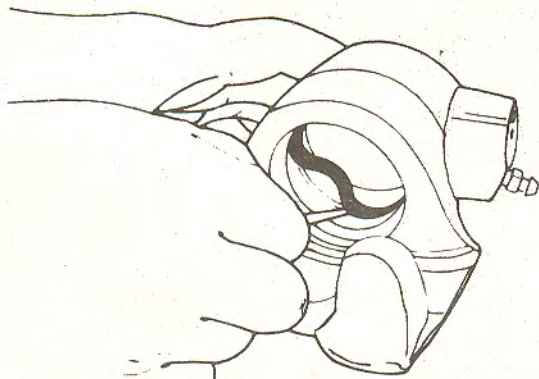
Use a pointed, blunt instrument when removing the seal from the groove in the cylinder body.
